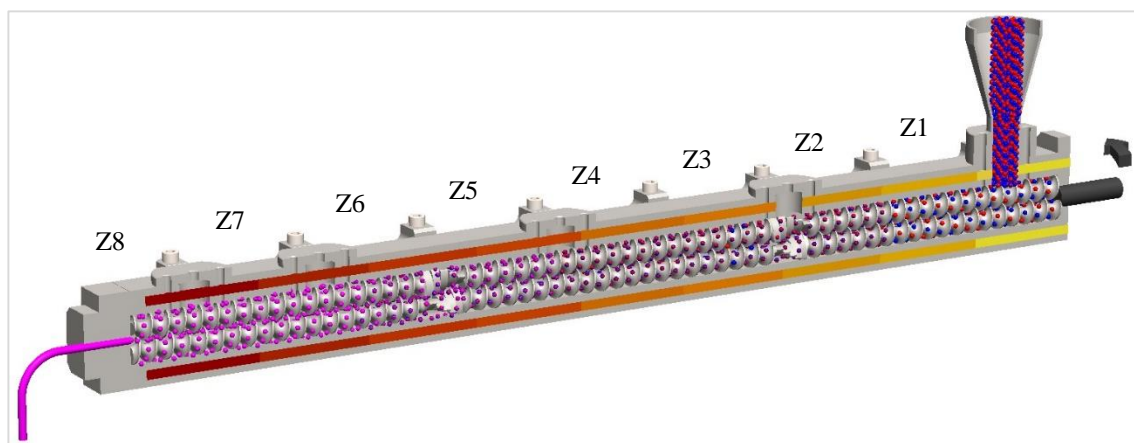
Schematic representation of extruder with 8-shaped cross-section heating zones. Source: Author.
